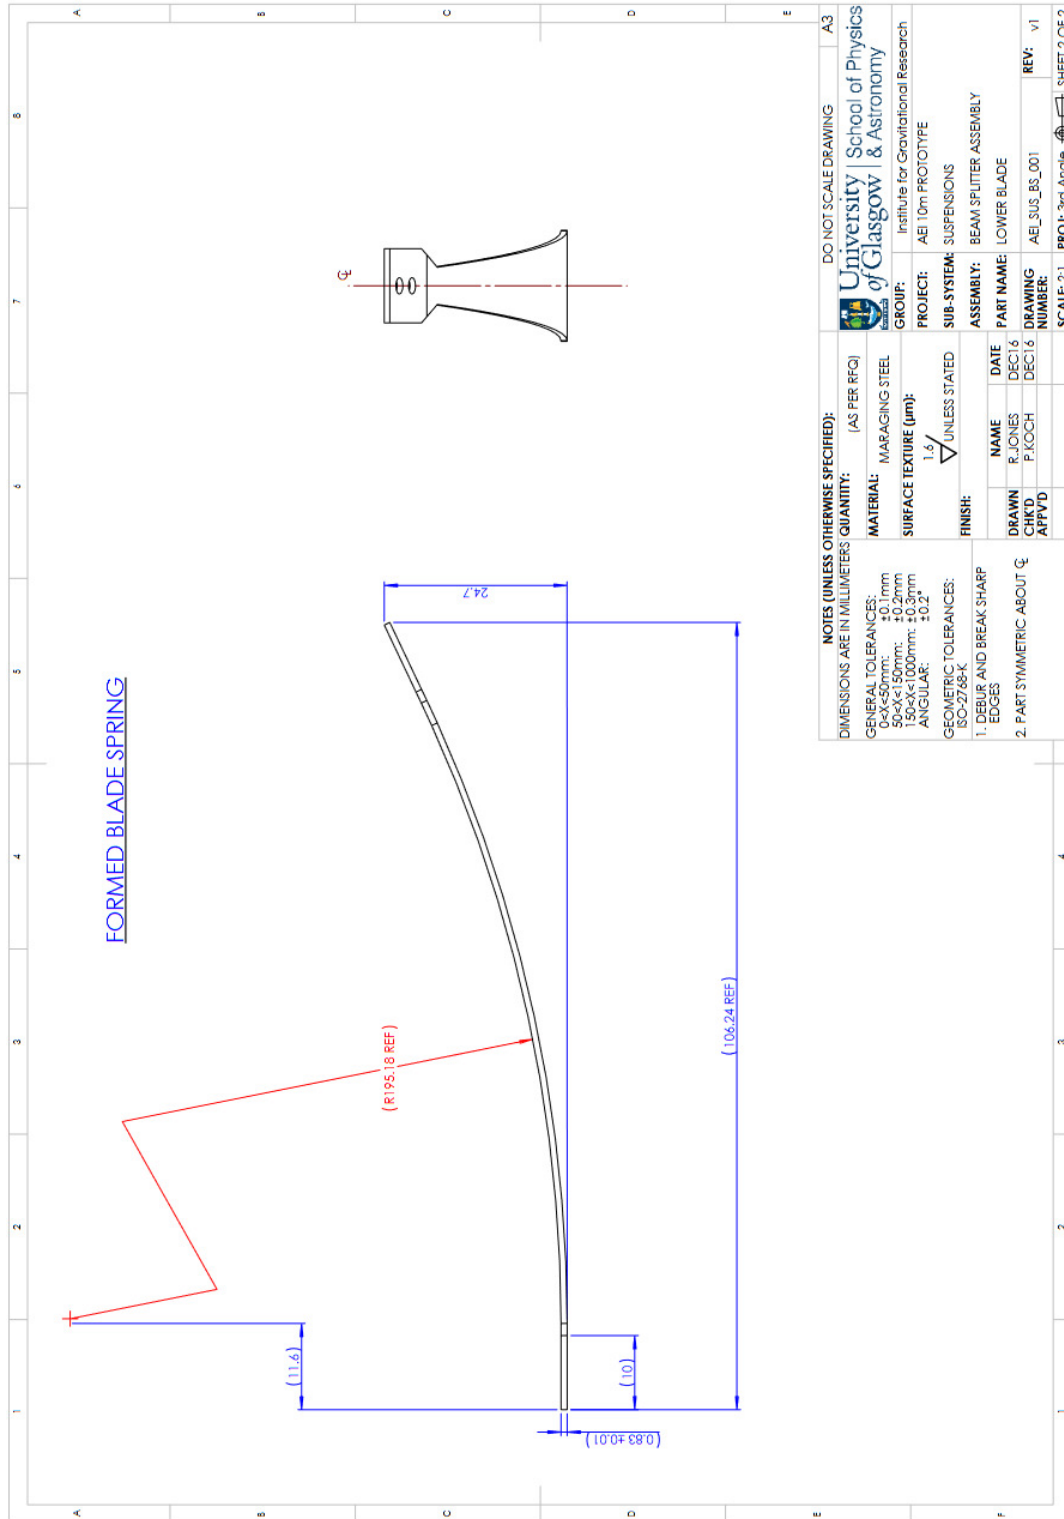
Drawing for the BS suspension's secondary blade spring page 2.
